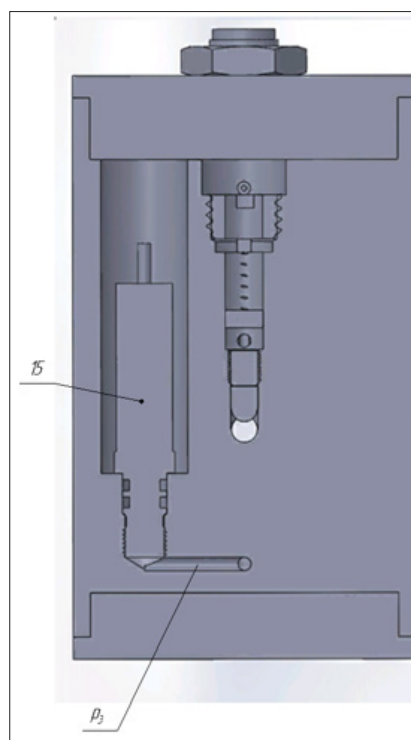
Cross-sectional View of the Pressure Sensor Setting
